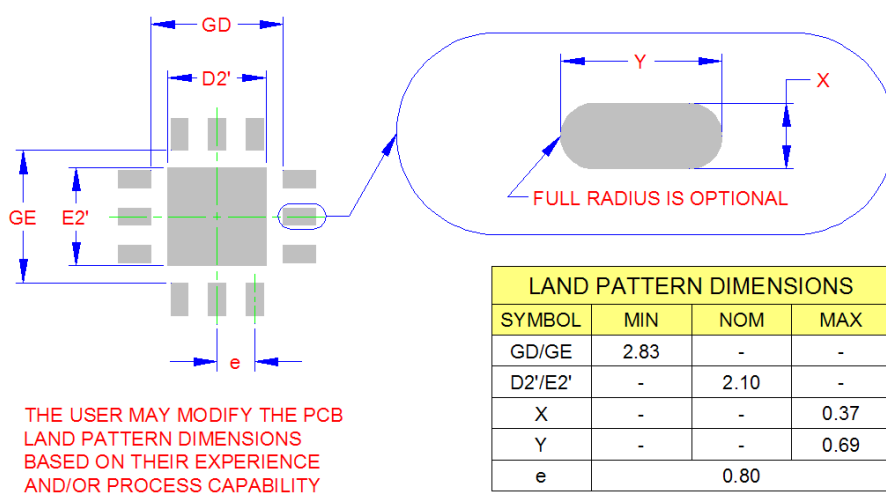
12-Pin QFN 4mm x 4mm Package Drawings
